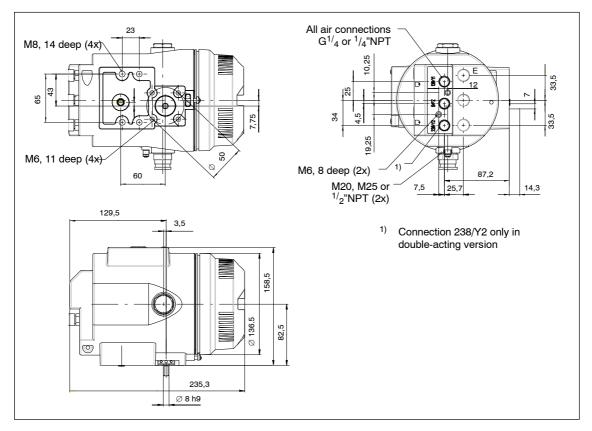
Dimensional drawing for positioner with metal housing in explosion-proof version 6DR5xx5
